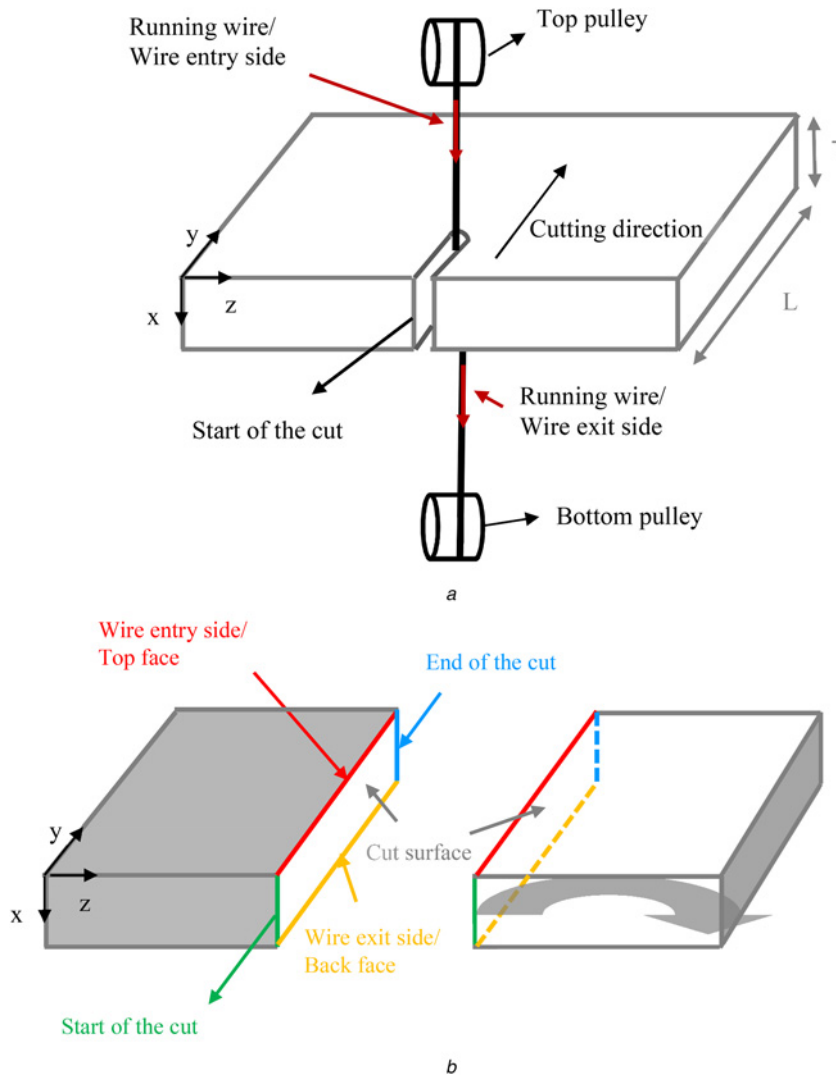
Schematic drawing of a test specimen that is being cut by WEDM
